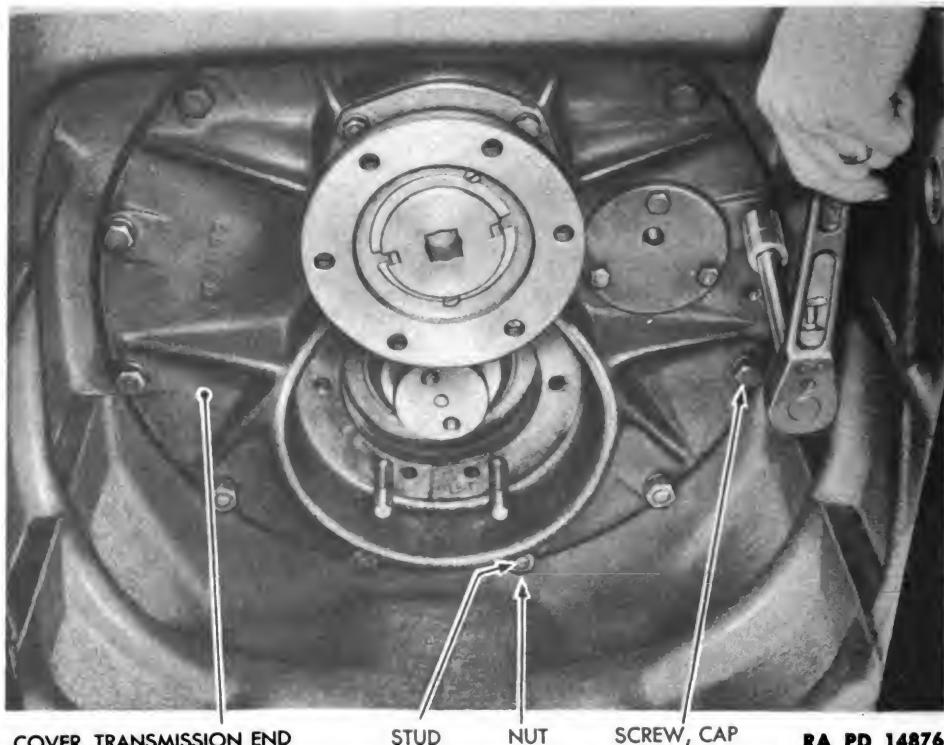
Bevel Pinion Shaft Front Retainer Washer Removal
